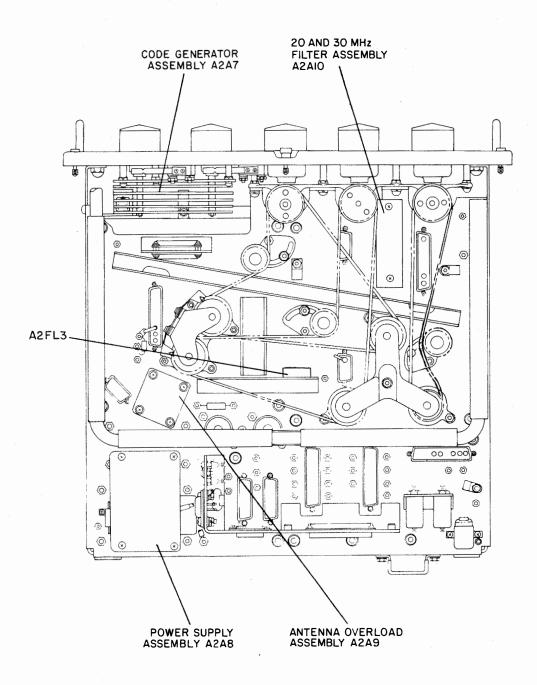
Radio Receiver R-1051G/URR, Bottom View, Case Removed
